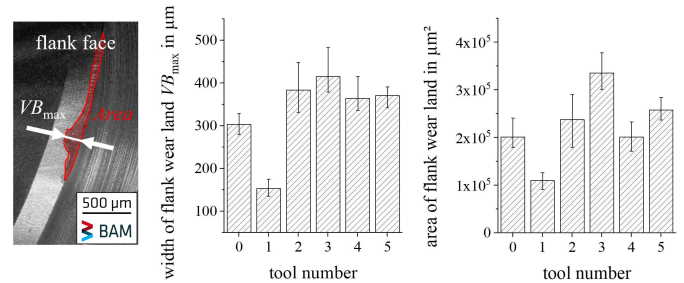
Tool wear measured by mean value of area and width of flank wear land VB_{max} of the four cutting edges of each tool after $V_c = 2500$ mm³.
